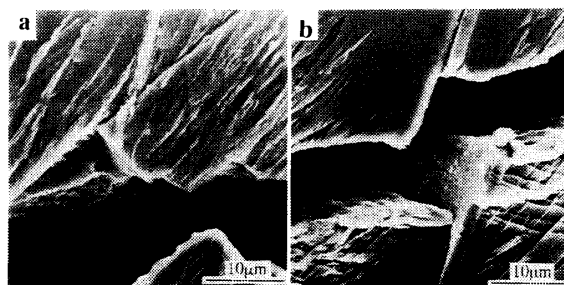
The intersections of fatigue cracks with mechanical twins on Specimen B. Just after the generations of the mechanical twins, the crack was passed through the twin without remarkable T.B. cracking (a), and some passages was accompanied by the T.B. cracking (b).
